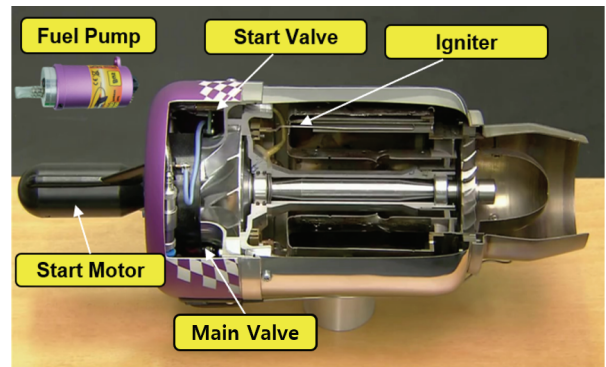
Micro gas turbine engine cutaway⁽¹²⁾
